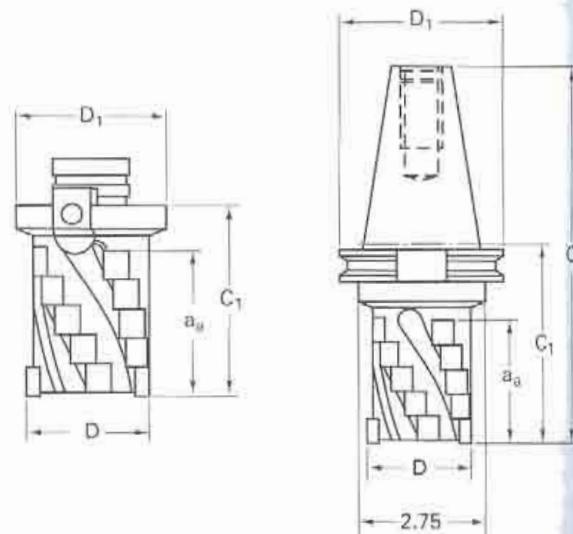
Solid end mills are often coated. Insert tooling end mills come in a variety of sizes and are mounted on taper shanks.
